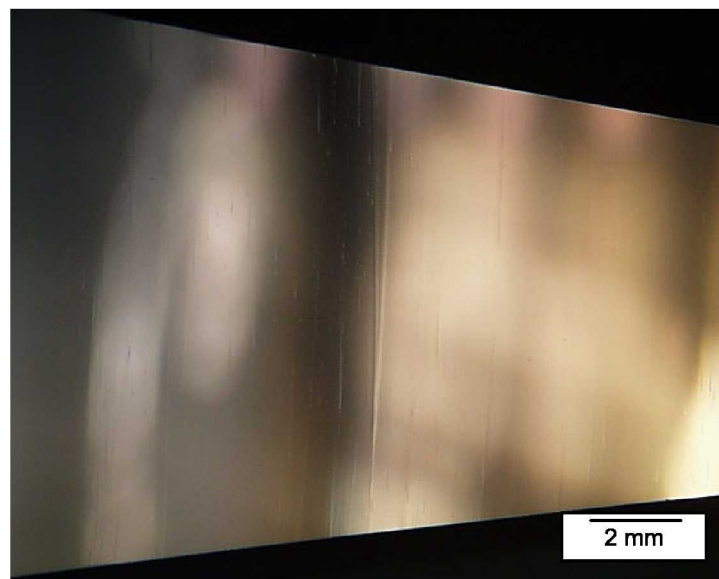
Grinding marks along extractor shaft of RSC no. 1.
